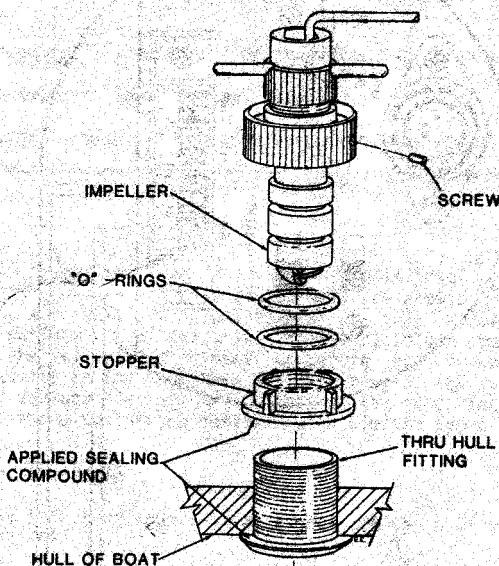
IMPELLER EXPLODED PARTS VIEW
